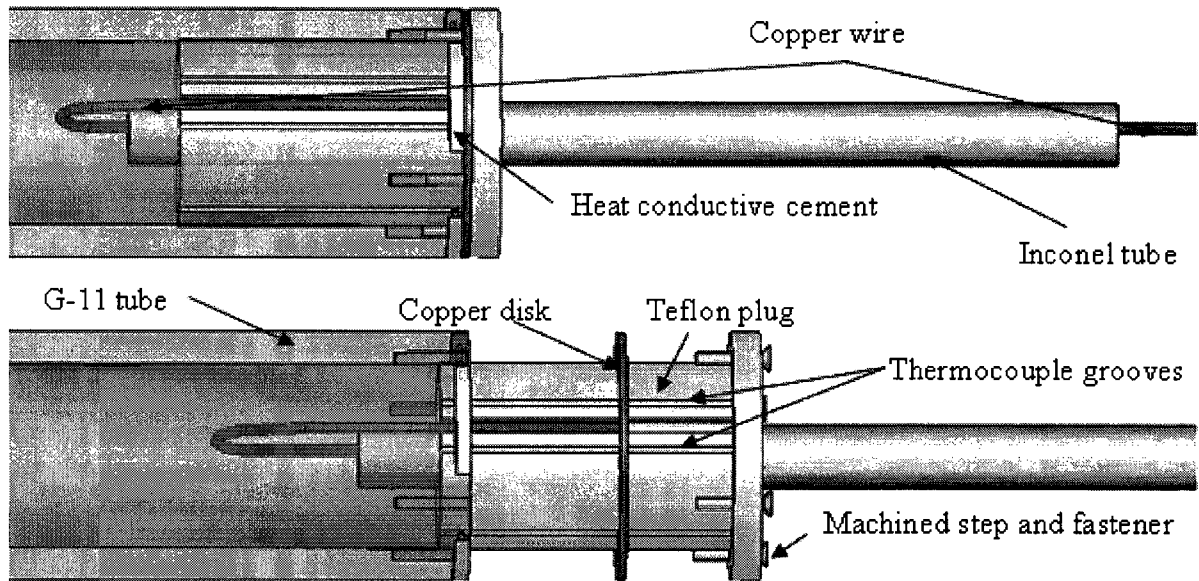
Exploded view of end section of inner cylinder without the stainless steel foil
